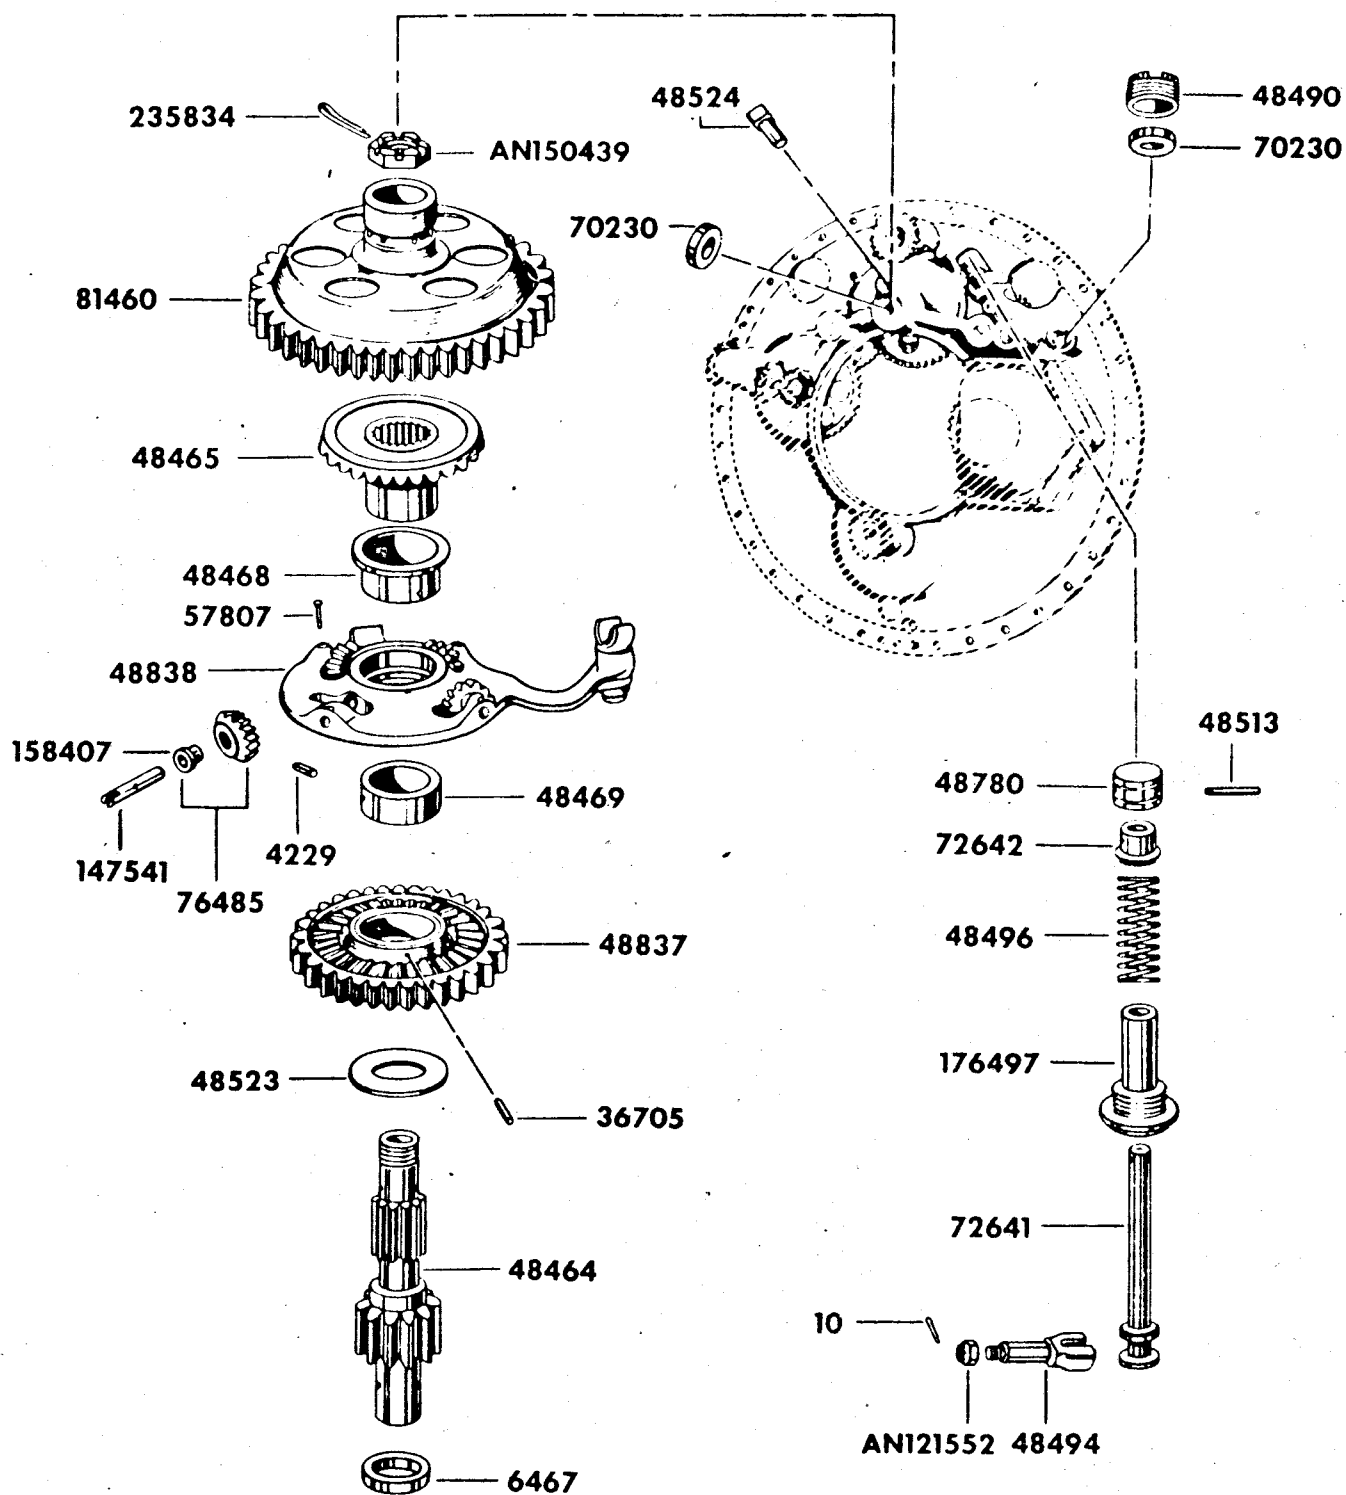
Magneto Drive, Cam Reduction and Spark Advance Gears. Spark Advance Piston.
